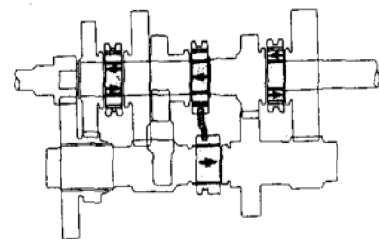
Cross sectional view of transmission gears showing shift collars.
